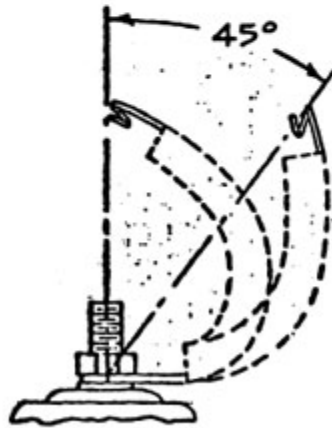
Fuse Element – Vertical Bushing Assembly
